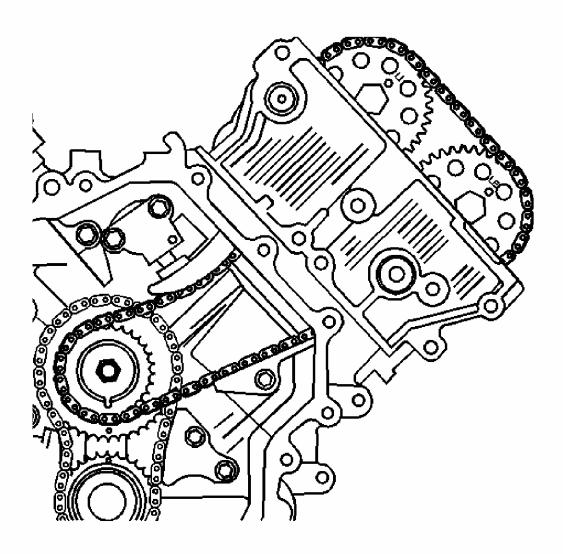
View of Left Intake & Exhaust Camshaft Sprockets Courtesy of GENERAL MOTORS CORP.
